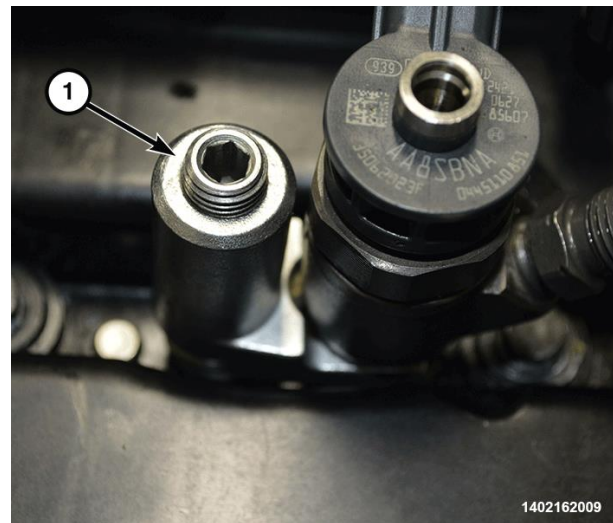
Injector TubesFigure 34 – Fuel Injector Clamp
